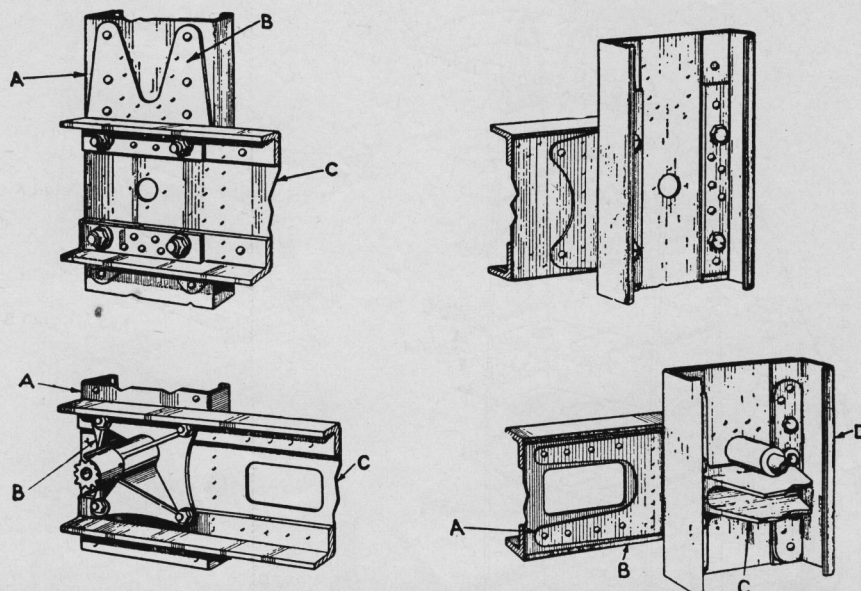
At the left are details of the Avro Lancaster stabilizer-to-front fin post joint. The sketch at the top left shows, looking forward, fin post (A); reinforcing plate (B); stabilizer front spar (C); while the sketch at the top right is of the same section but looking aft. The lower sketches depict the attachment of the rear spar to the rear fin post; the sketch at the left the view aft showing rear fin post (A); rudder trim tab control bracket (B); stabilizer rear spar (C). The lower right sketch shows, looking forward, reinforcing plate (A); spar (B); rudder hinge bracket (C); rear fin post (D).
